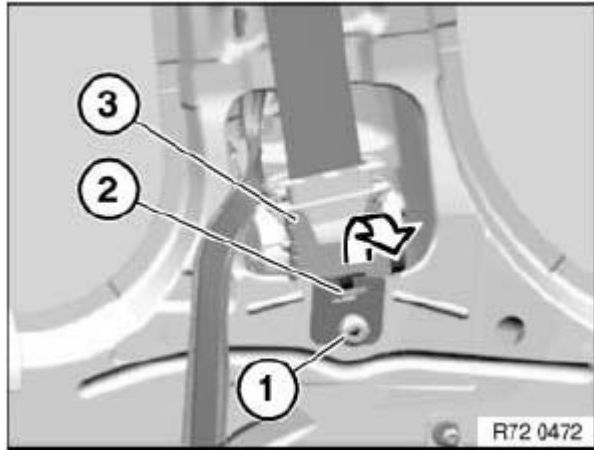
Identifying Retaining Screw, Automatic Reel And Coding
